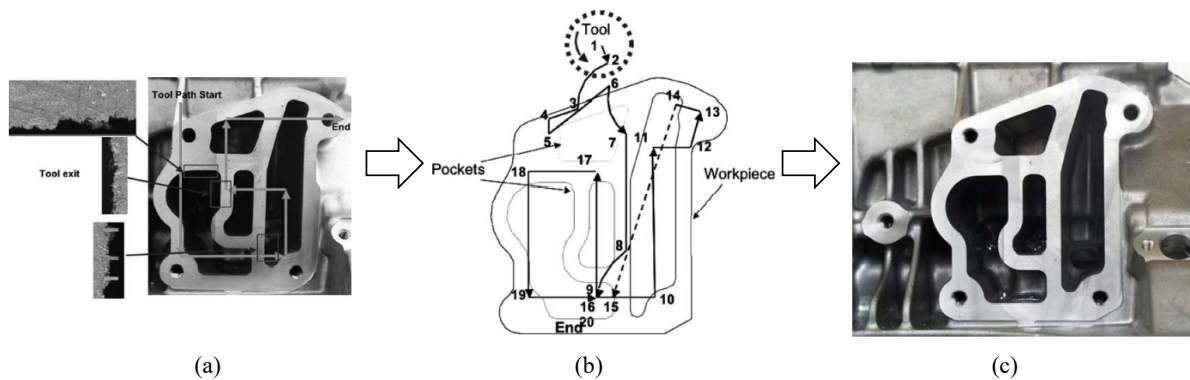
(a) Conventional tool path for face milling engine block face and resulting burrs at key locations (b) Modified tool path for part (c) Workpiece resulting from optimized tool path; Tool path length: old path – 209 mm, a new path – 524 mm, cycle time with increased feed rate remain at 5sec.
